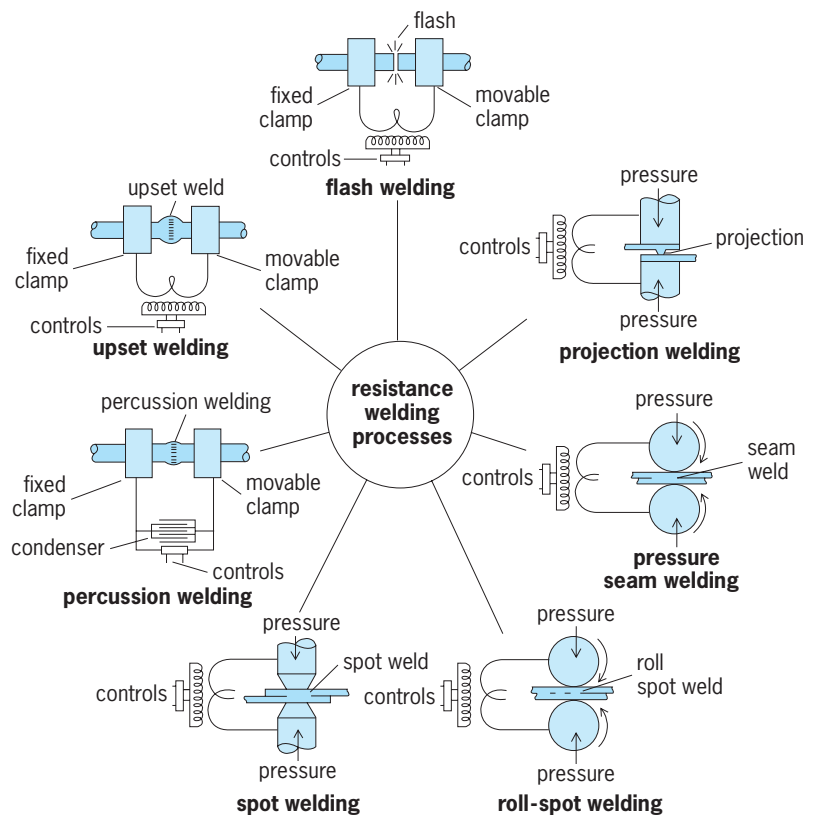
Comparison of basic resistance welding processes. (After B. E. Rossi, *Welding Engineering*, McGraw-Hill, 1954)
